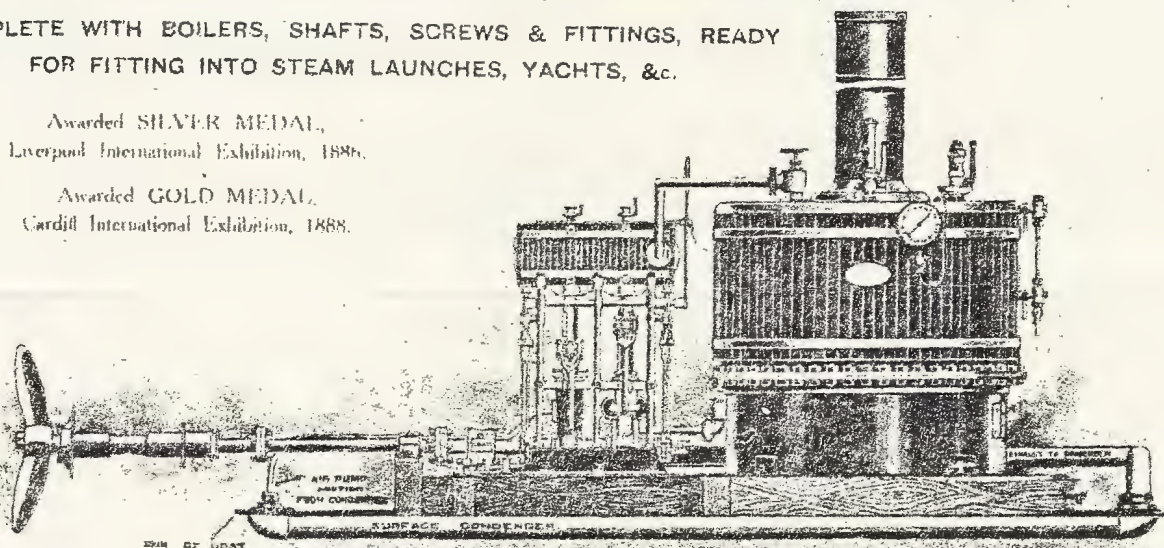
COMPLETE SURFACE CONDENSING MACHINERY, AS FIXED IN BOATS.
